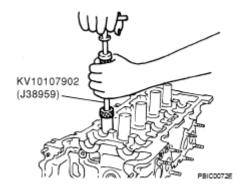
Compressing Valve Spring With Valve Spring Compressor Courtesy of NISSAN MOTOR CO., U.S.A.
